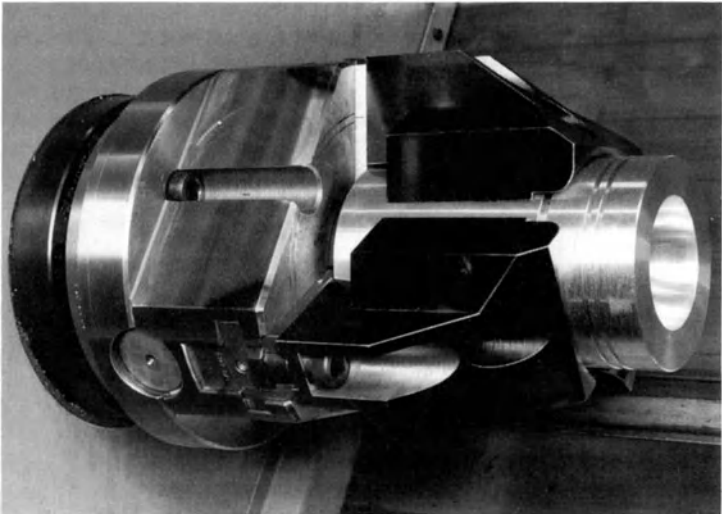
A specially engineered chuck for the machining of piston crowns. [Courtesy of Gildemeister (UK) Ltd.]
